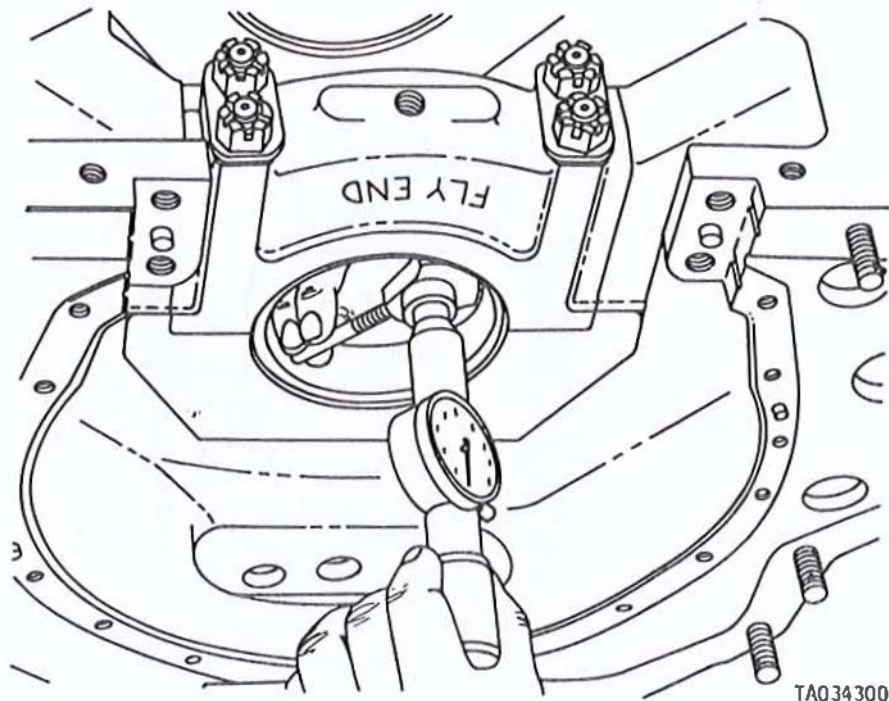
Checking inside diameter of main and main thrust bearings.
